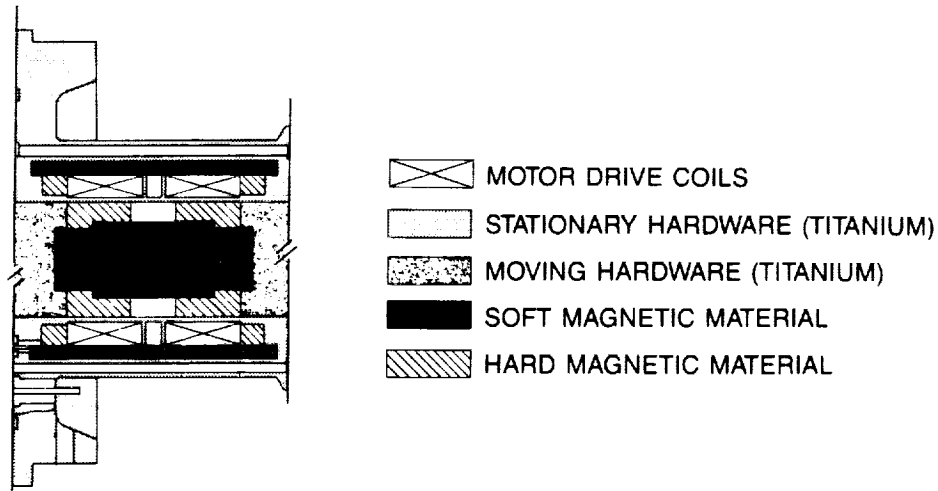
Cross-sectional view of displacer motor/magnetic spring.
